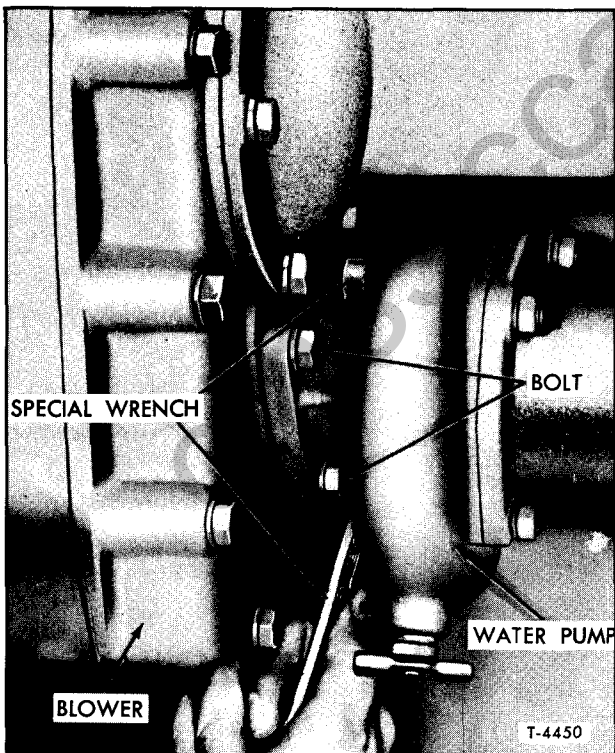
Loosening Inner Water Pump-To-Blower Attaching Bolt with Special Tool (J-4242)
